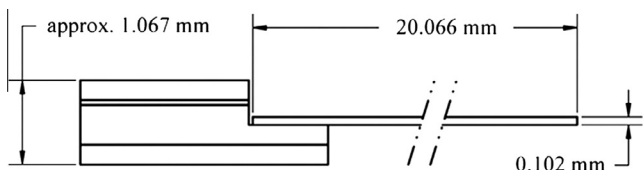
Side view schematic and dimensions of the model DT-670-SD package.
